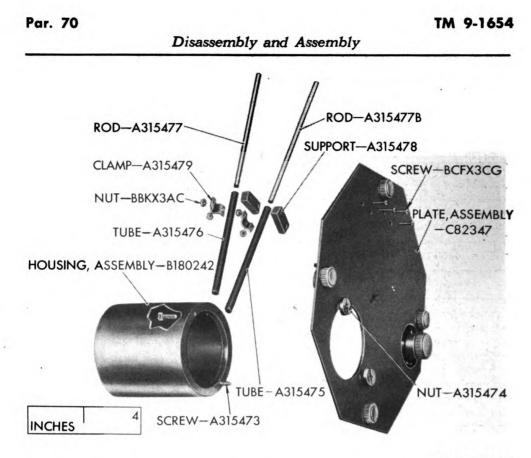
Target Lamp Housing Assembly and Associated Parts Exploded From Target Housing Cover of Trainer M7
